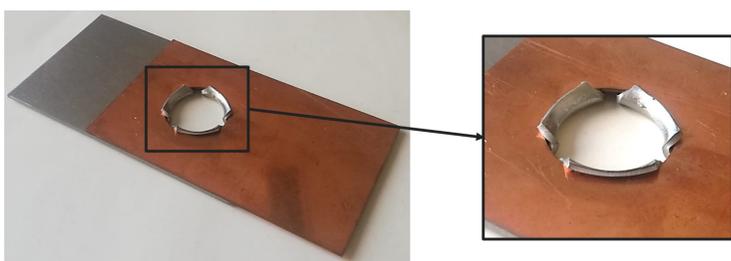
Novel joints between copper and aluminum busbars produced by hole hemming.
